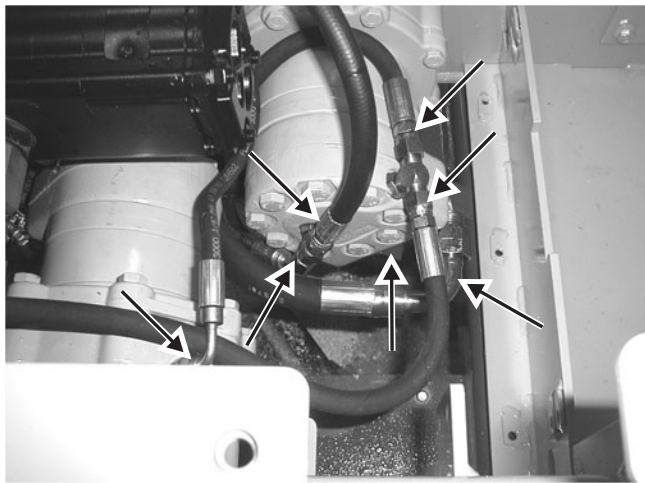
Disconnect all hydraulic hoses from drive motor to be removed.
